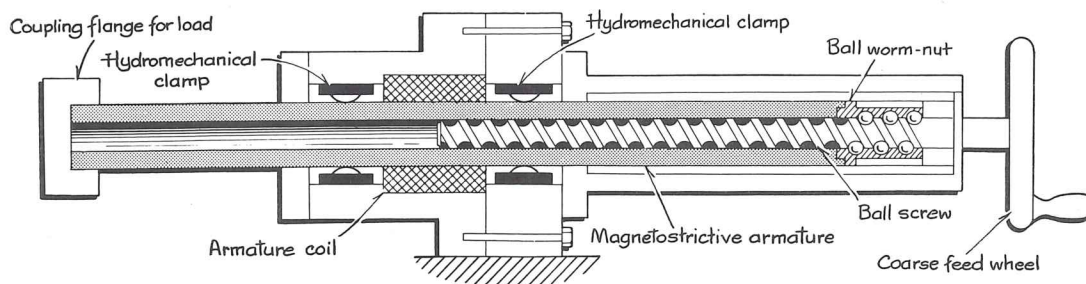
Cross-sectional view of an Inchworm motor assembly shows the magnetostriuctive armature, hydromechanical clamps, and actuating coil. The hand wheel and lead screw mechanism are used for original setup and coarse feed operations. After the machine tool has been set up by the coarse feed to the correct part size, minute changes in position of the movable machine element are effected by the magnetostriuctive motor.
